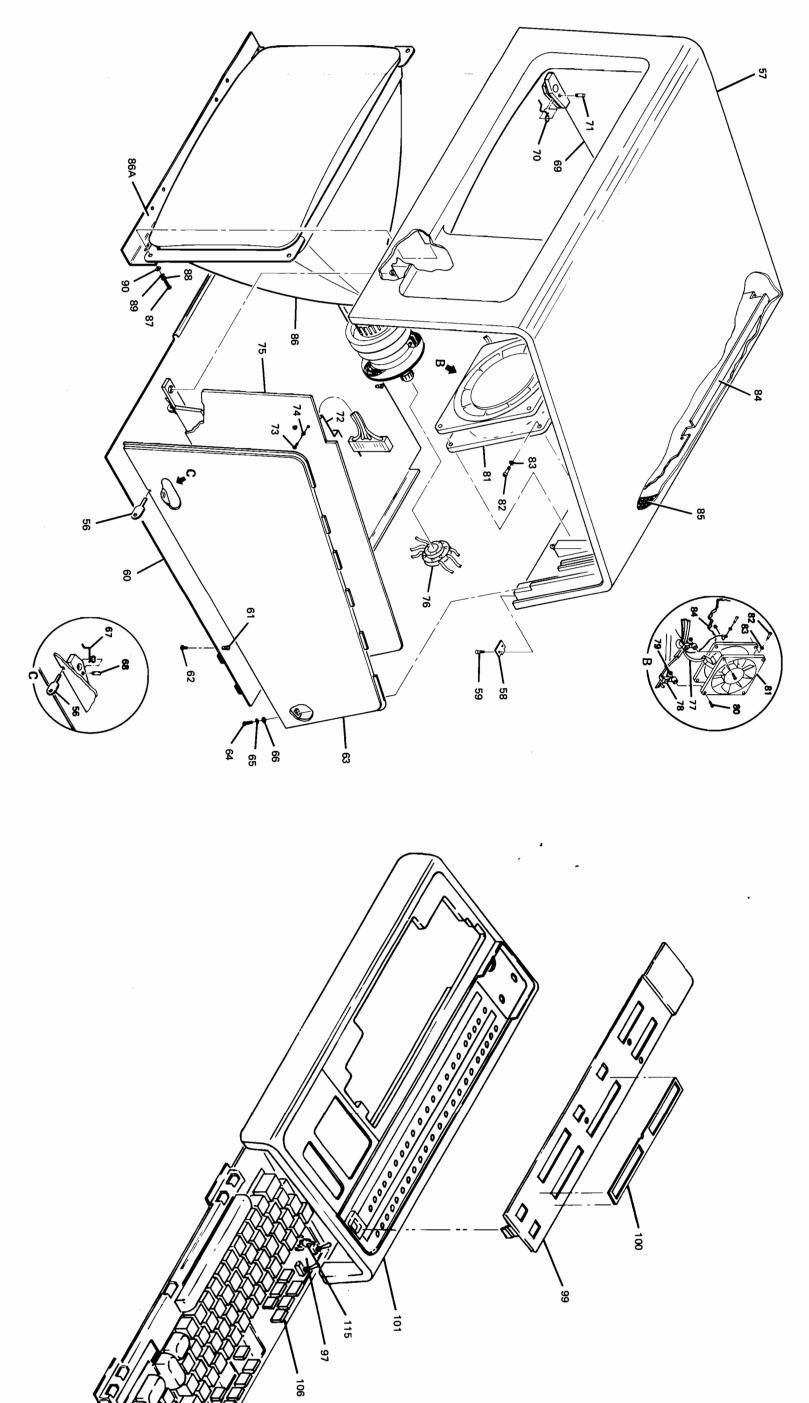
HP 2649D REMOTE/250 Console, Exploded View
